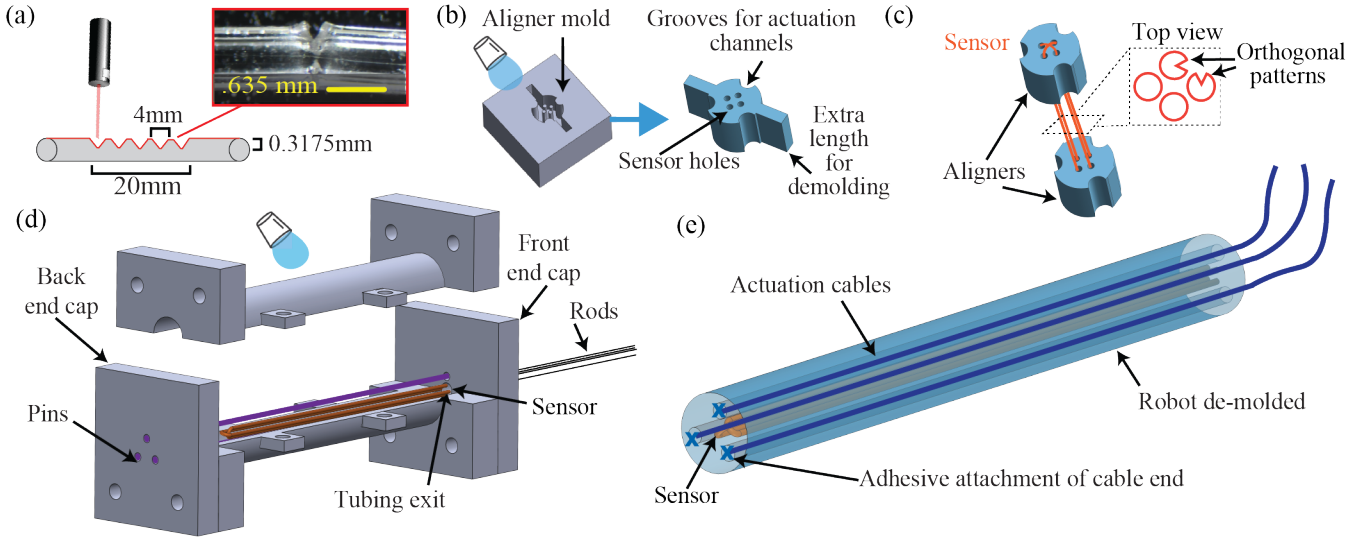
Fabrication of the soft continuum robot. a) Laser patterning of the upper surface of the sensor producing V-shaped cuts. b) Two aligners are molded by pouring silicone into a 3D printed mold. The aligners have grooves for accommodating the actuation pins and four holes for accommodating the sensor tubing. c) After removing the extra material needed for de-molding the aligners, the sensor is looped inside them, placing the patterned surfaces orthogonal to each other. d) Three stainless steel rods are inserted into the sensor and the latter is placed inside the continuum robot mold, along with three pins for the actuation channels. Silicone is poured into the two halves of the mold and, after degassing, they are sandwiched together, and cured. e) The continuum robot is removed from the mold. Three cables are inserted into the actuation channels, and secured at the robot tip with adhesive.
